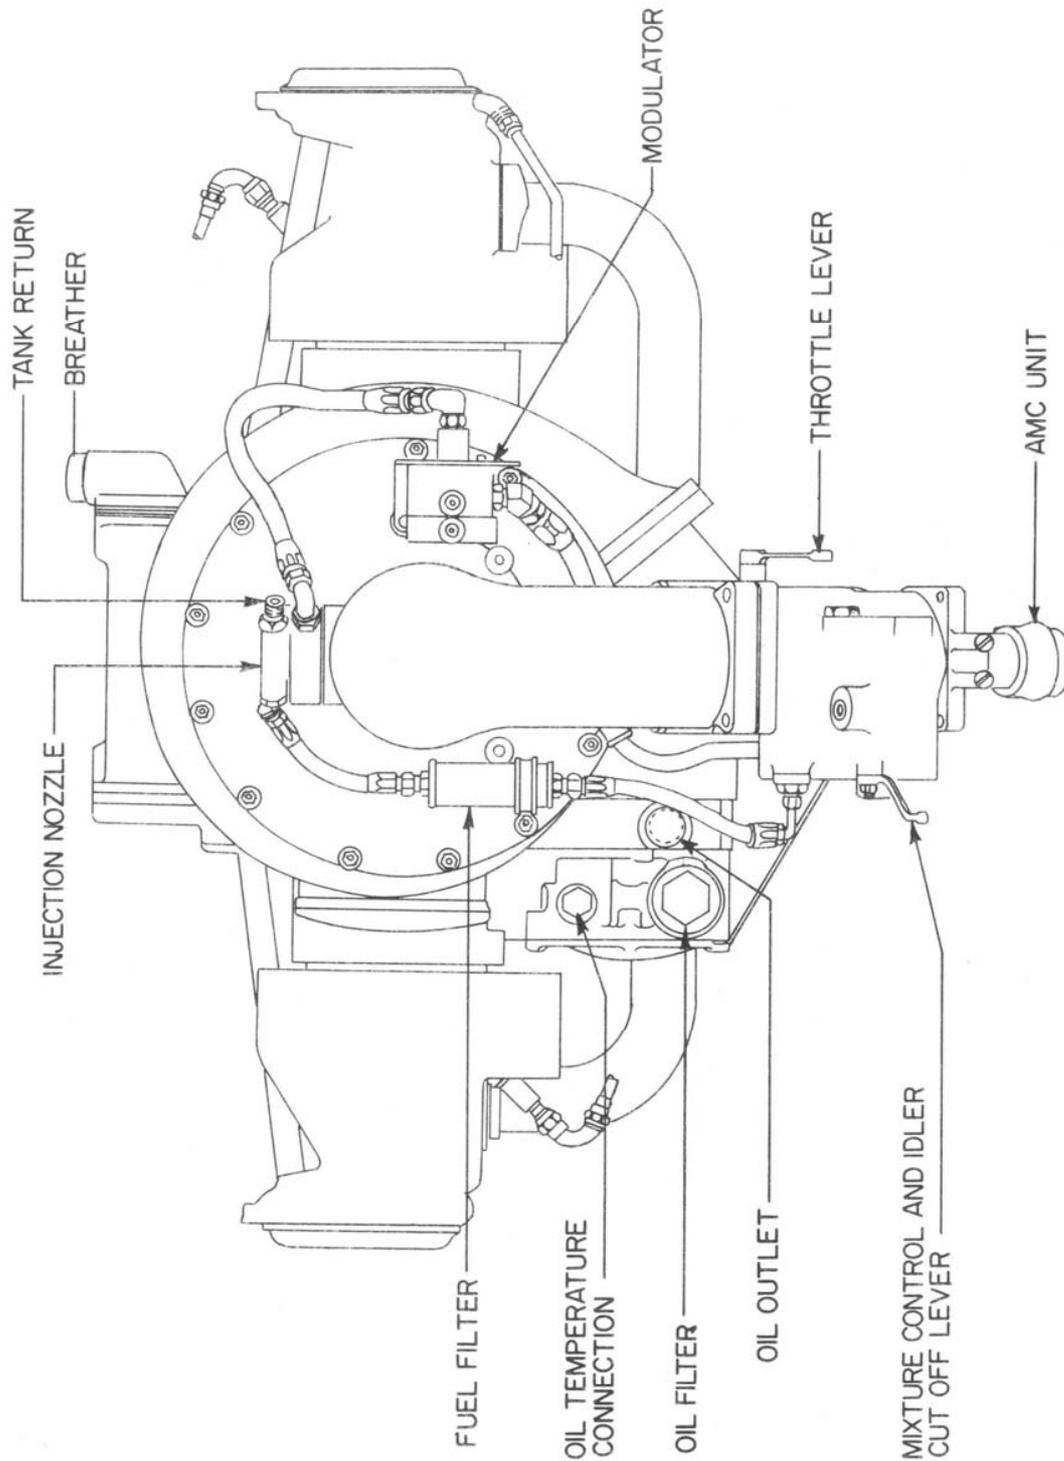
Installation Drawing – Typical IGSO-540-A Series – Rear View
